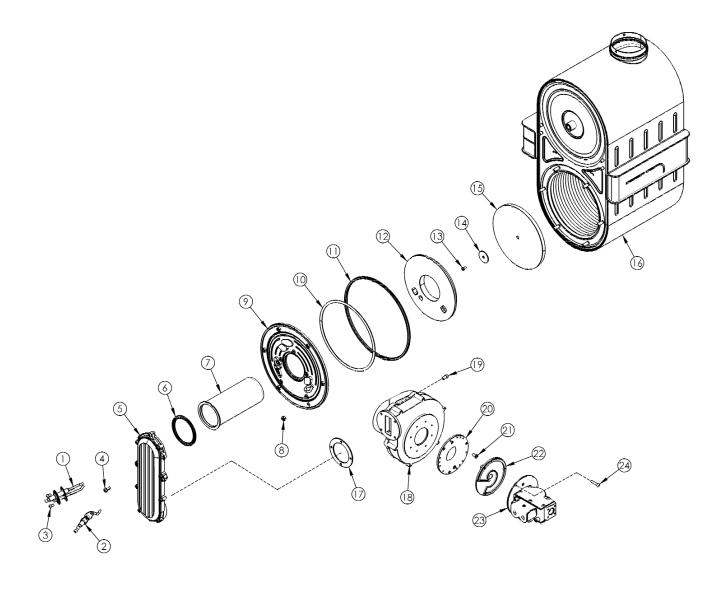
Heat Exchanger/Burner Assembly Repair Parts
